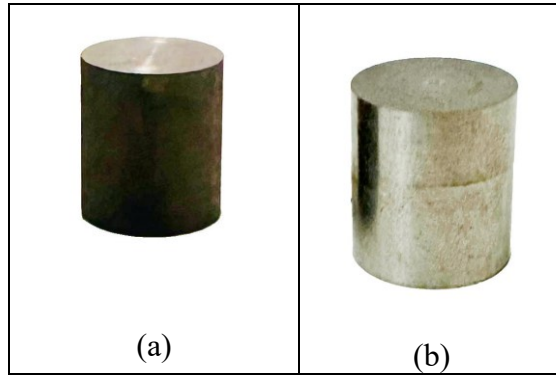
2 As-built heat-treated and machined (a) vertical build specimen, (b) horizontal build specimen
